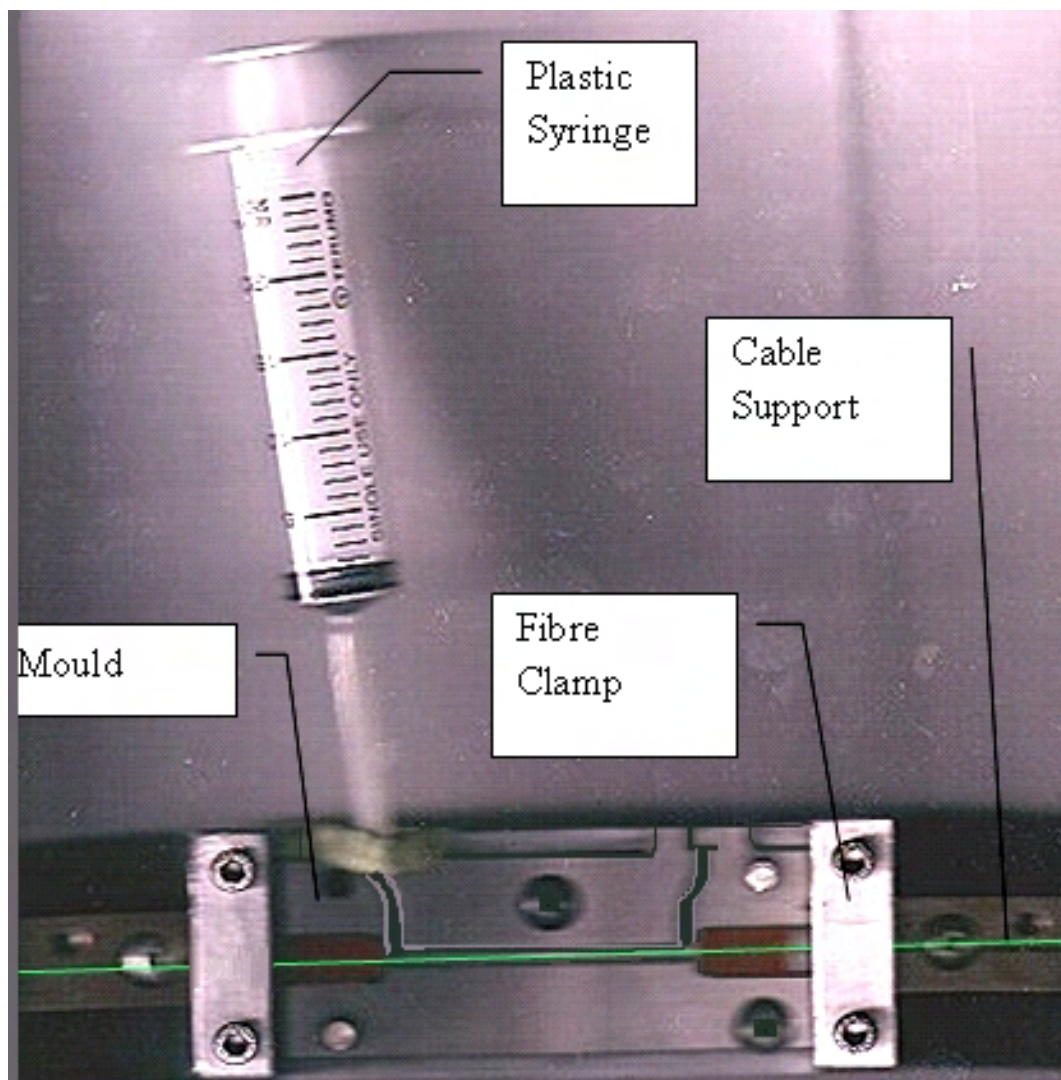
Assembly of BLUERR smart probe moulding system; top platen missing
